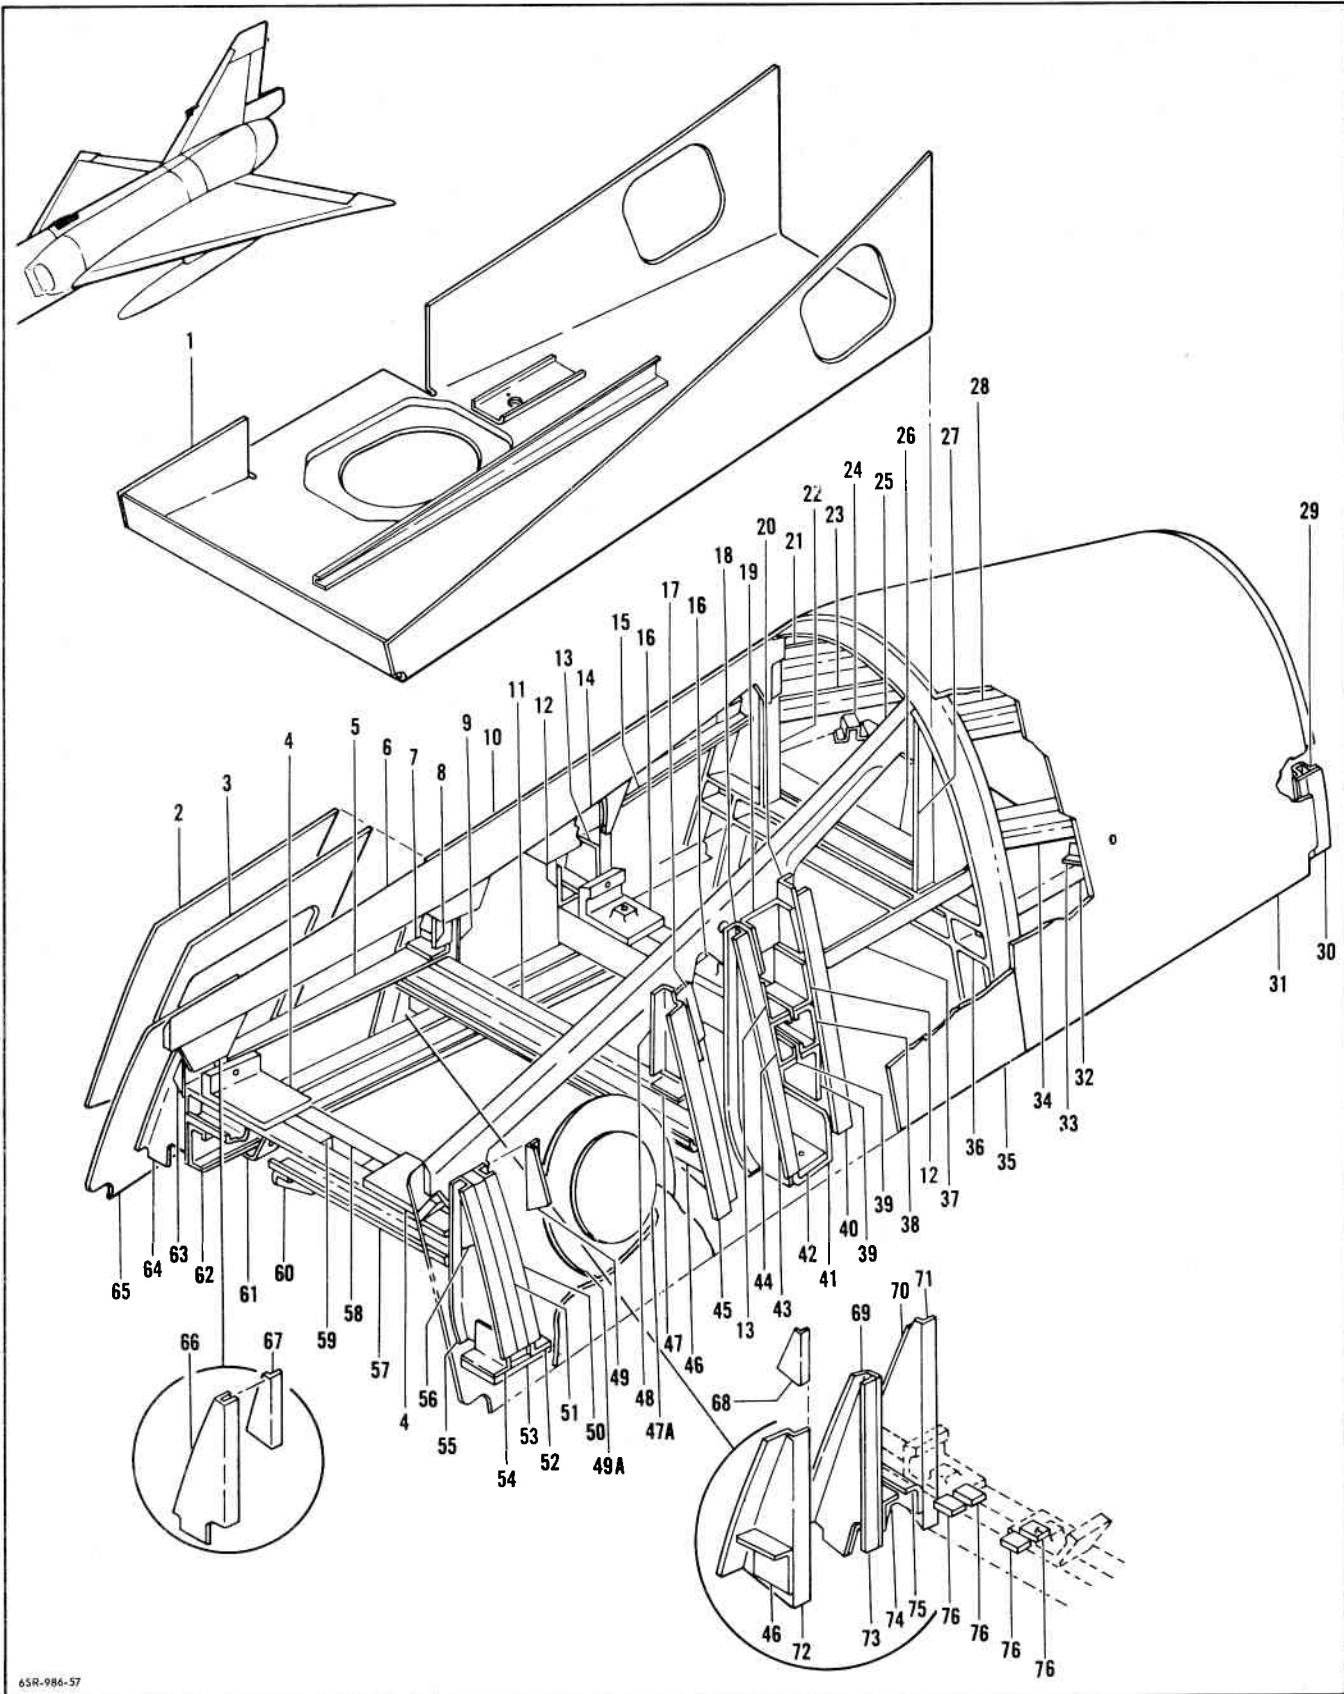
B. Aerial Refueling Slipway Door and Hinge Supports, F-106B (Sheet 1 of 3)
